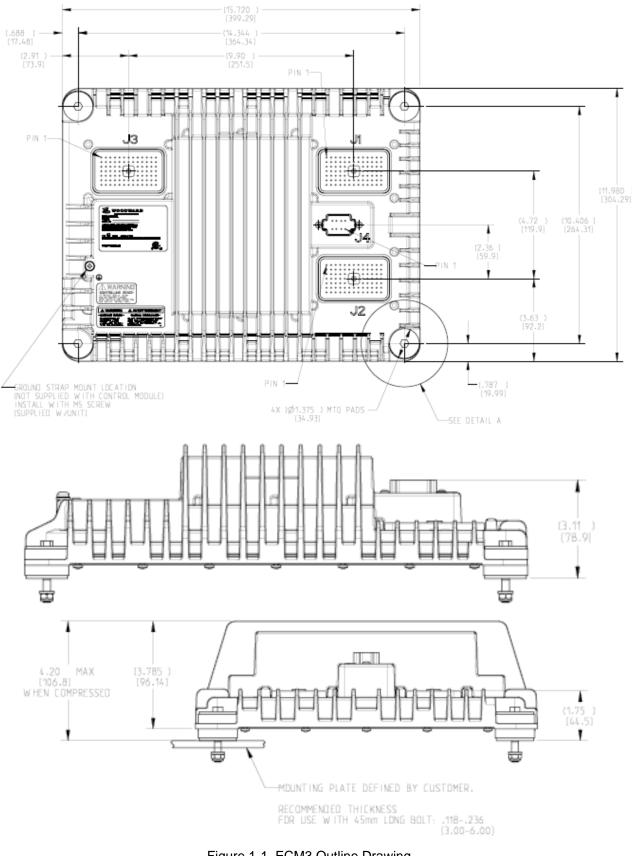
ECM3 Outline Drawing (Dimensions are shown in inches)
